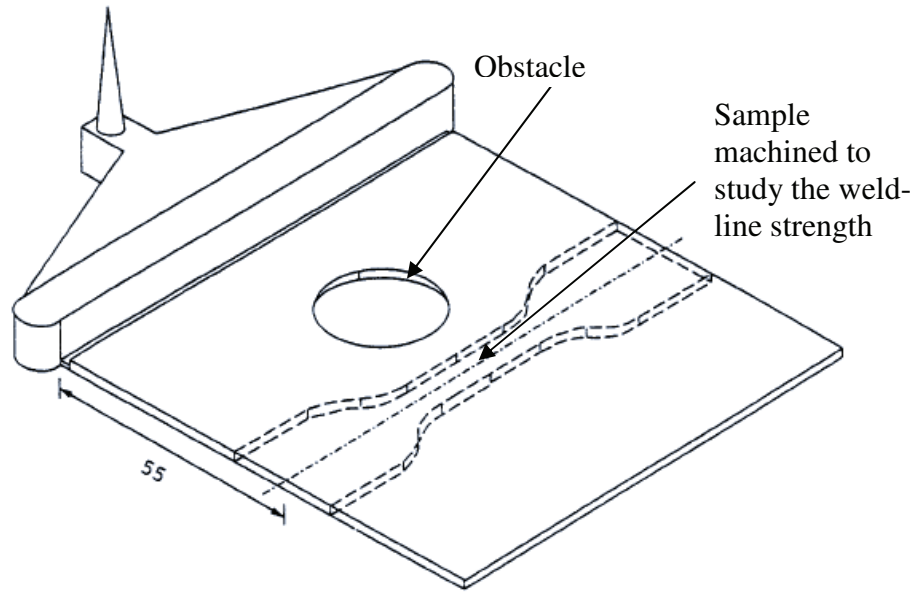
Weld-lines formed due to presence of an obstacle [62]
